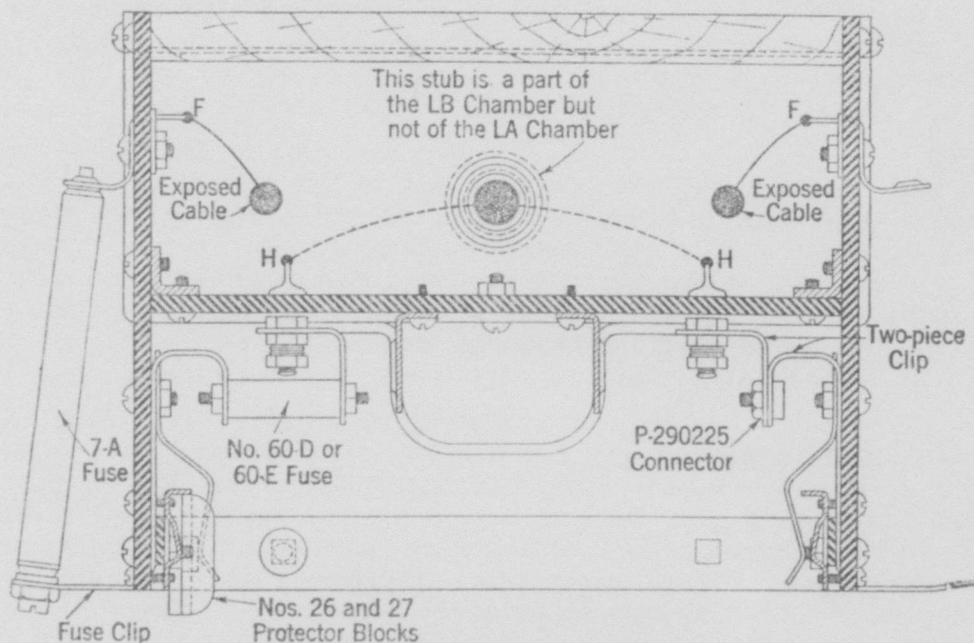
Cross-sectional View of LA or LB Type Fuse Chamber.
